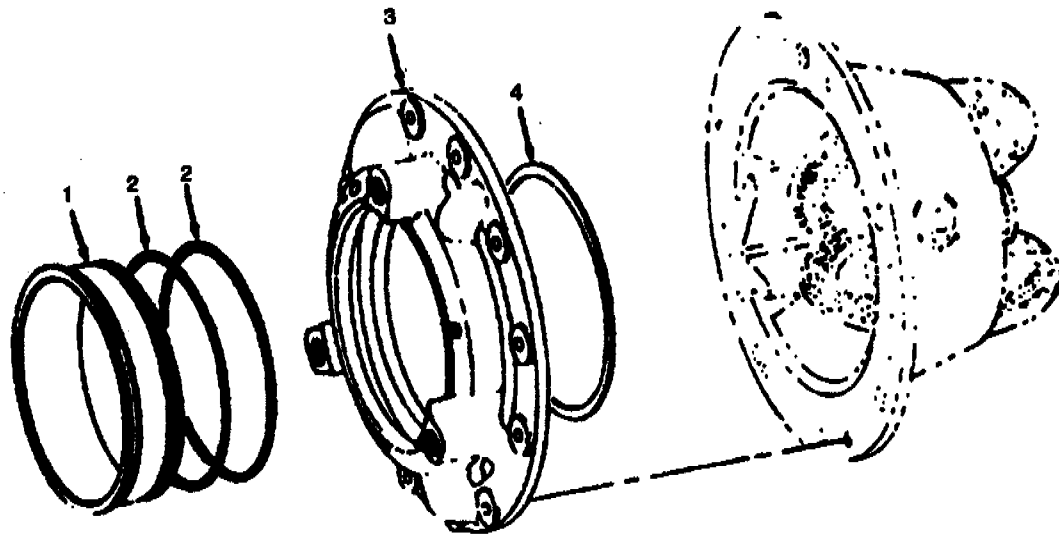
Oil Transfer Support Assembly (T53-L-13B, -703).
